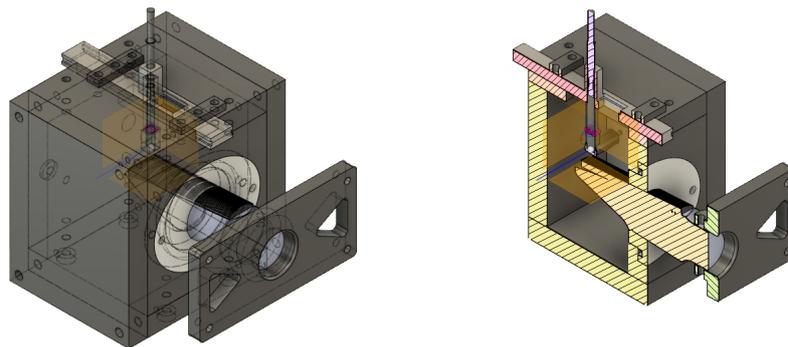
Left: Mouthbox assembly including the mouthpiece, mouthpiece retainer, lip-bar, lip positioning slider and mouthpiece coupling adaptor. Right: The mouthpiece assembly viewed as a cross-section depicting the internal orientation of the lip positioning relative to the mouthpiece.
